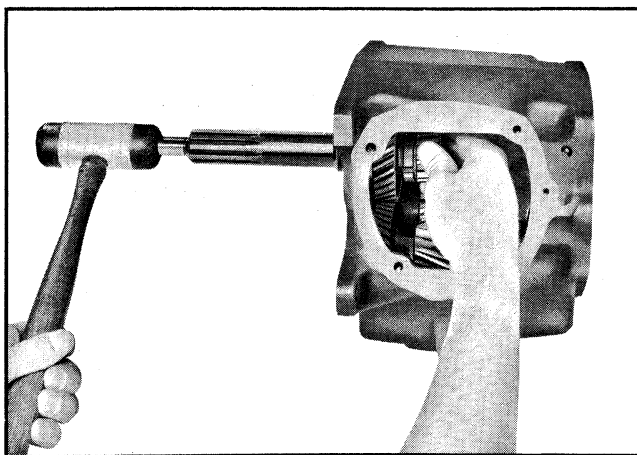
Removing Clutch Gear and Bearing Assembly
